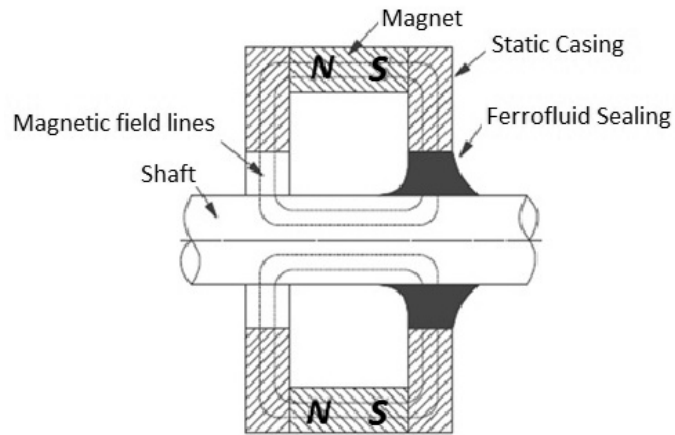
Ferromagnetic seal of the movable connection shaft to its casing support [9]
